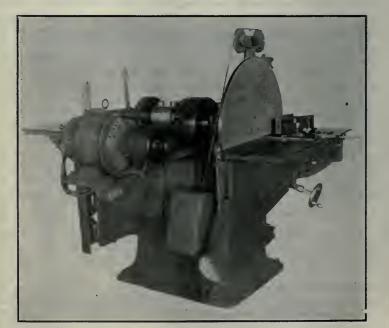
MOTOR-DRIVEN PATTERNMAKER'S GRINDER.
